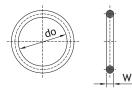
O-ring to cover the lubrication fitting on the top
